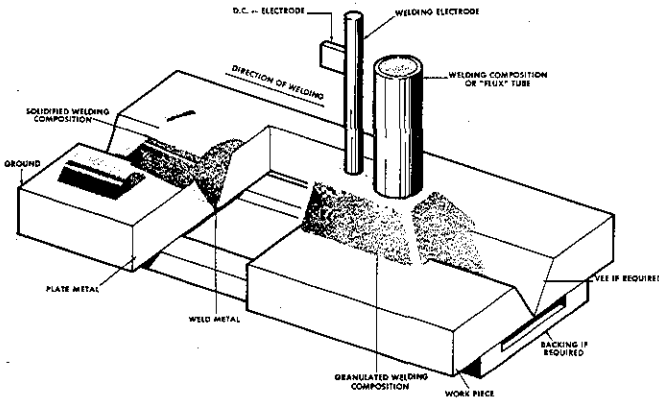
Connections for Submerged-Arc Welding (SAW)
